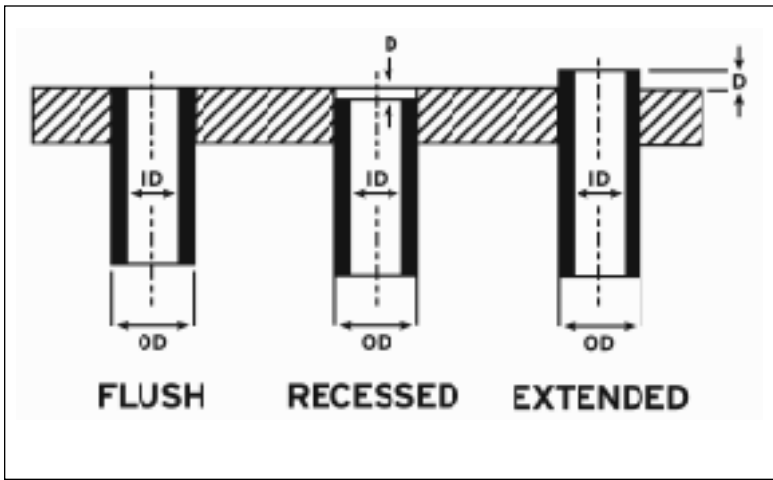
Flush welds are usually fusion seal welds; recessed and extended are typically strength welds with wire added.
